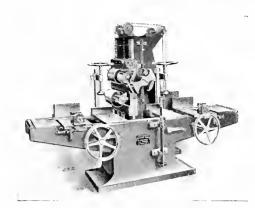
No. 525. Vertical Automatic Car Sill Tenoning Machine.
